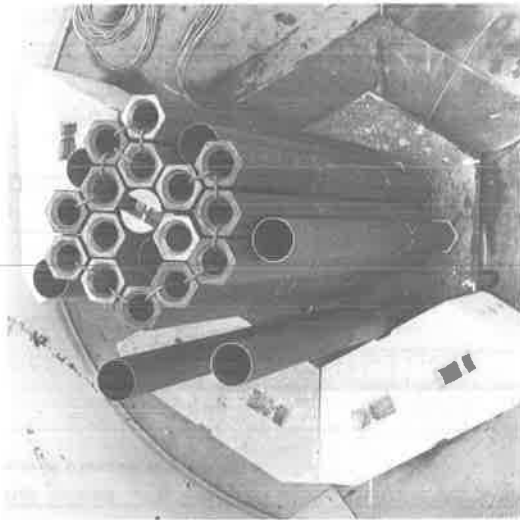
Guide Tubes and Second Row of Sub-assemblies during assembly of the Model
